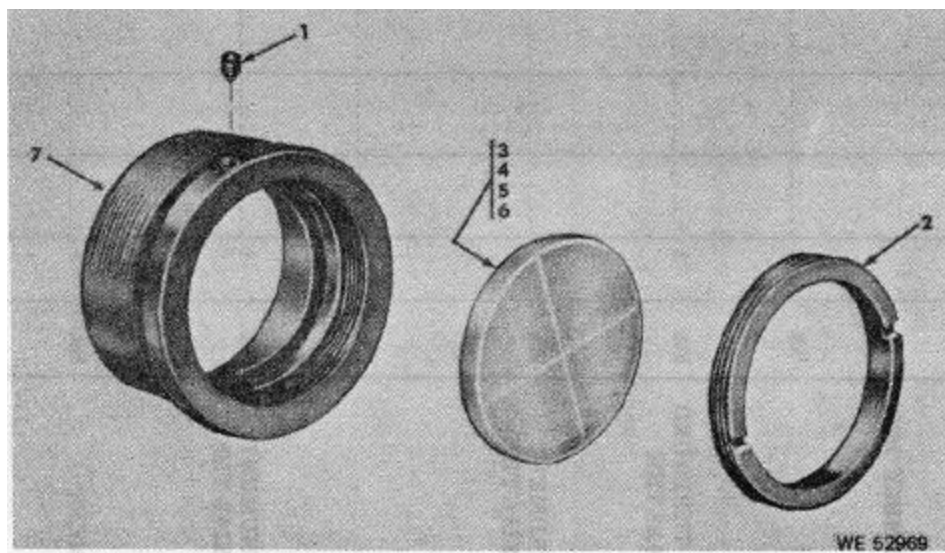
Cell reticle assembly 7647628 (M12A7C), 8243175 (M12A7H), 8570119 (M12A7Q), 8289214 (M12A7S) -exploded view.
